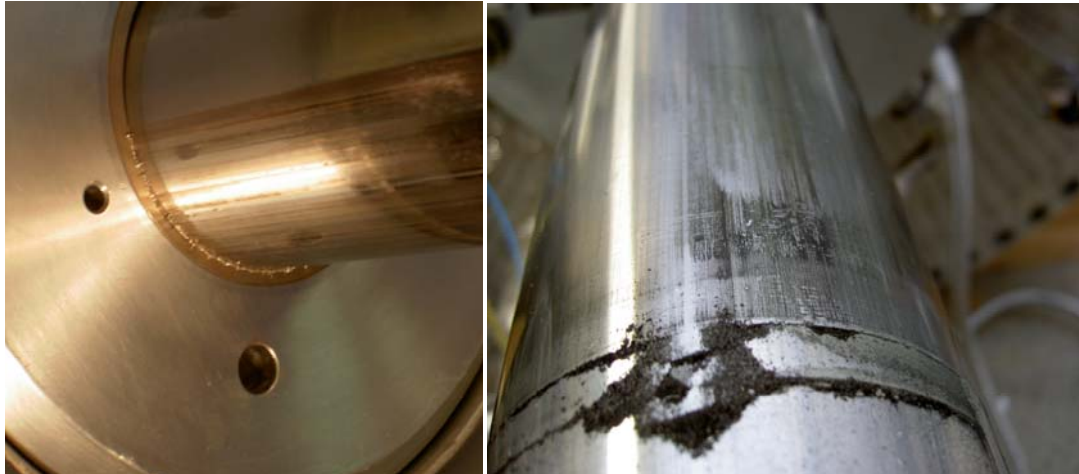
The photos show the results of the valve shaft movement in the area of the inlet valve (left) and the dust at the valve actuator caused by the viton seal abrasion (right).
